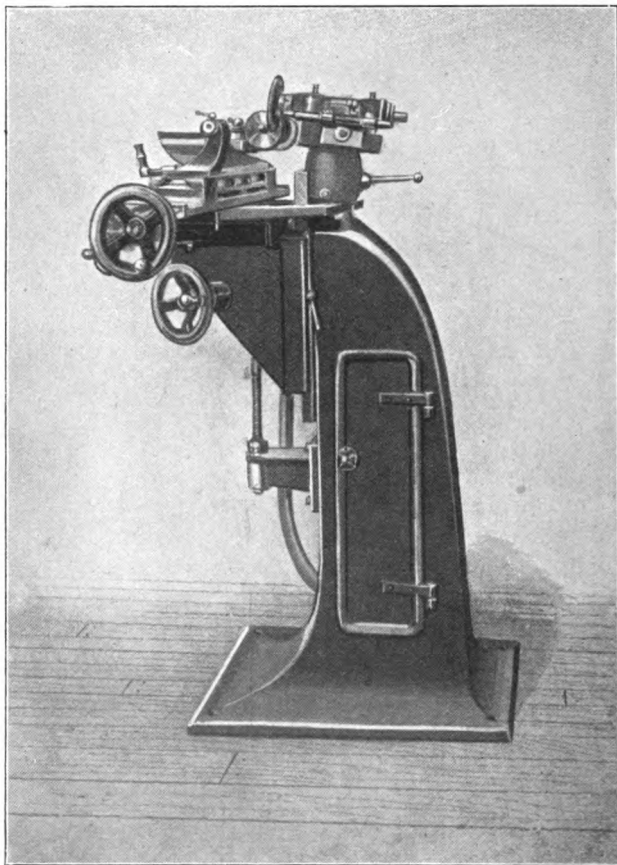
"Guest" Emery Grinder. Position for Grinding Reamers and End Mills.
